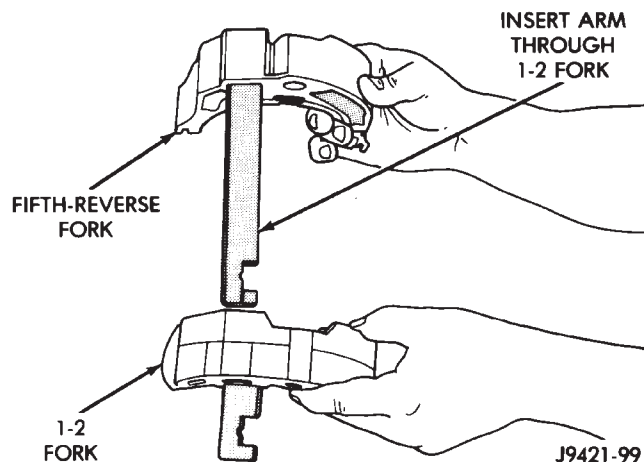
Assembling 1-2 And Fifth-Reverse Shift Forks
